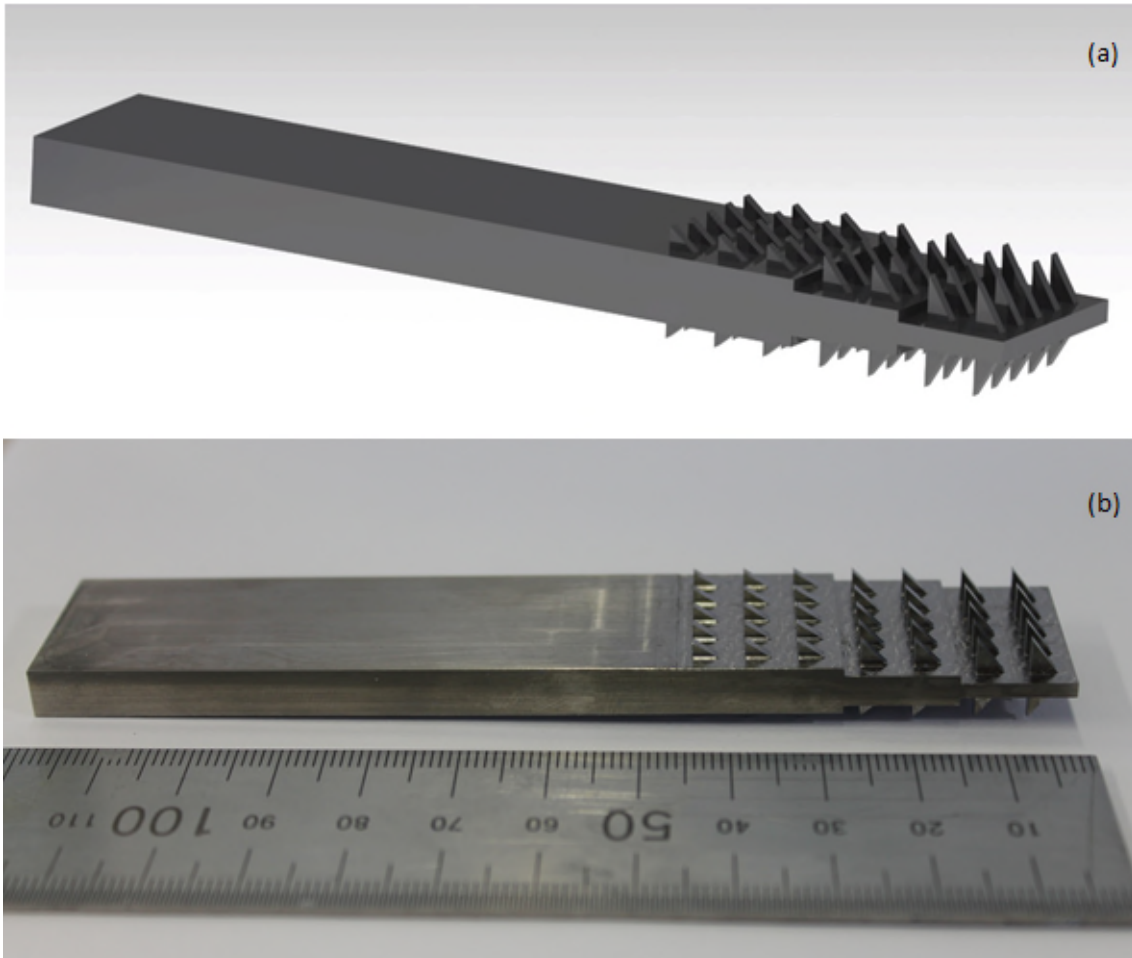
Double-stepped joint with shark teeth shape pins: (a) 3D CAD image, (b) micro-machined joint
